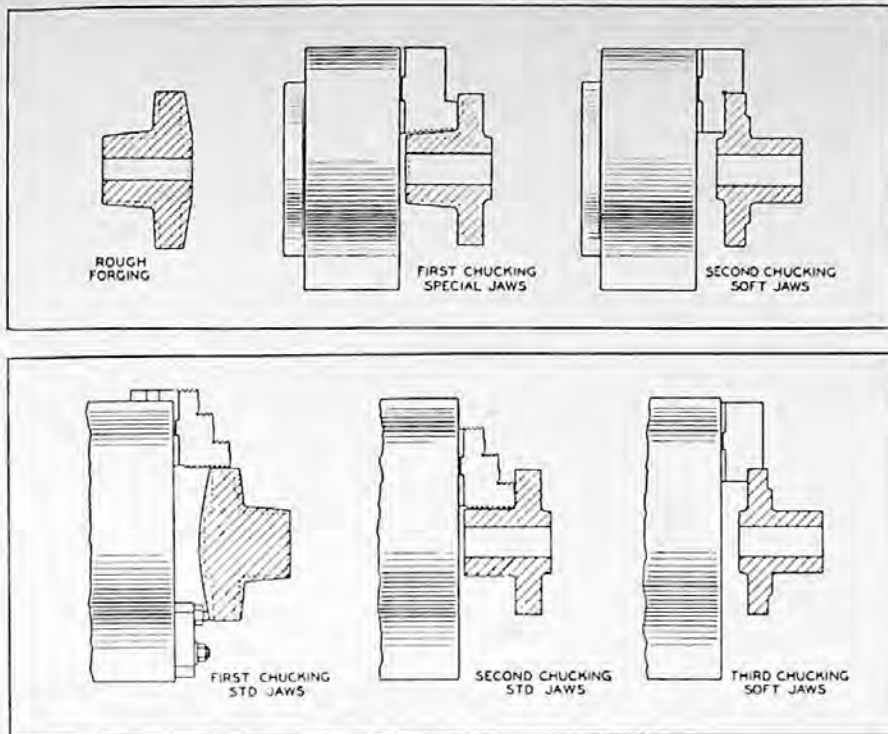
A—(Above) Special jaws fit draft angle on forging, permitting job to be done in two chuckings. Soft jaws are used in second chucking and grip on flange which is almost twice the diameter of the hub, thus maintaining desirable relationship between grip and cutting torque. FIGURE 2B—(Below) Standard jaws require additional chucking. A rough cut is taken on the hub in first chucking to prepare a straight gripping diameter. This chucking method is more suitable for small lot production jobs than those illustrated in Figure 2A.
